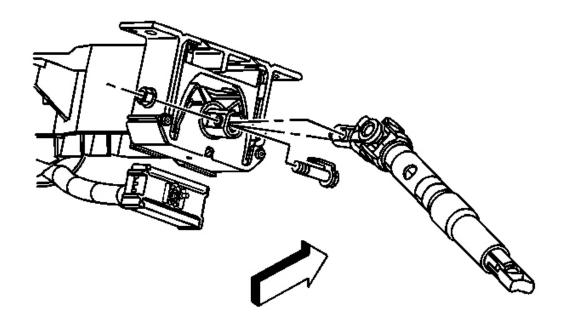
View Of Steering Column & Upper Intermediate Shaft Courtesy of GENERAL MOTORS CORP.
